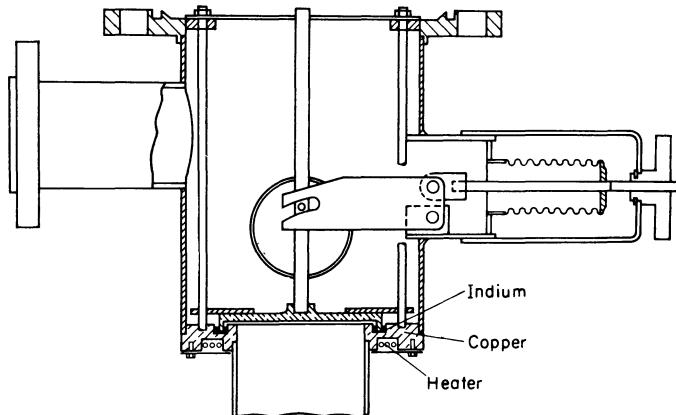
Valve using indium seal in the closing system. After Reynolds¹⁰⁵⁰ (*Courtesy of Pergamon Press*)
